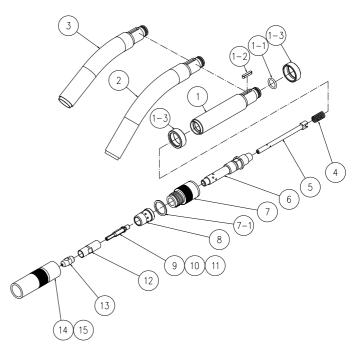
Exploded diagram for RZ3510S, RZ3510H, RZ3510L
